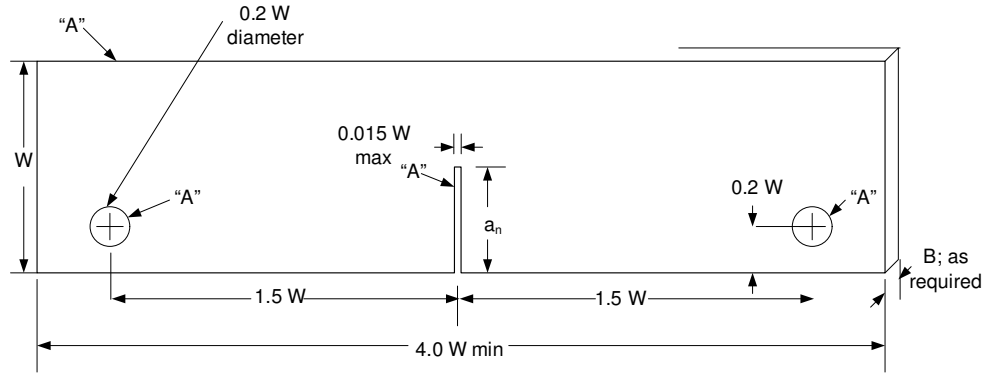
Translaminar Fracture Toughness Test Specimen Schematic
